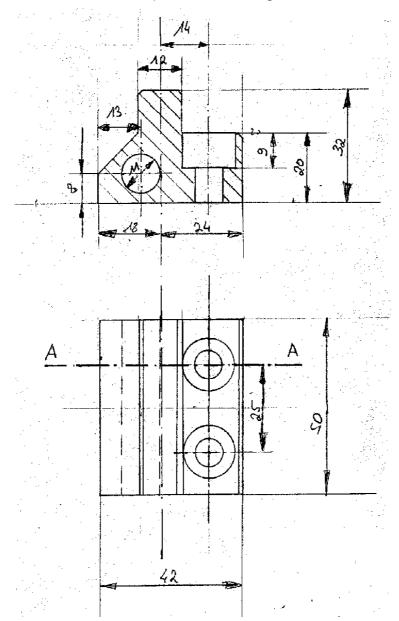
Brake anchor at the swingarm (mount with plate with two welded nuts)
